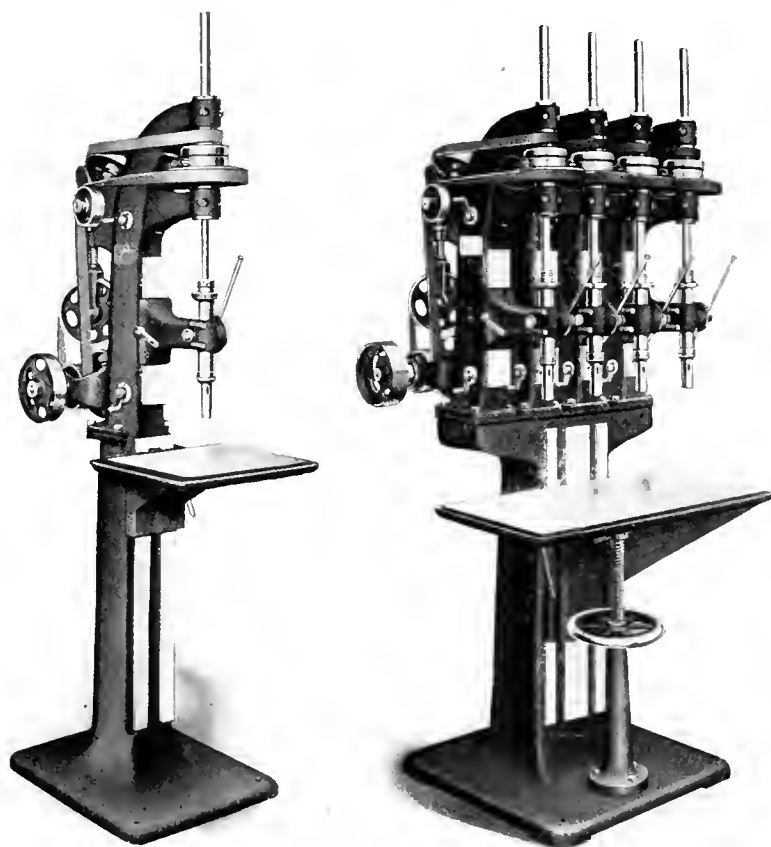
Single-spindle Sensitive Drill Press, Fig. 2. A Dwight Slate Machine of the Multi-spindle Type built by Dwight Slate Machine Co.
